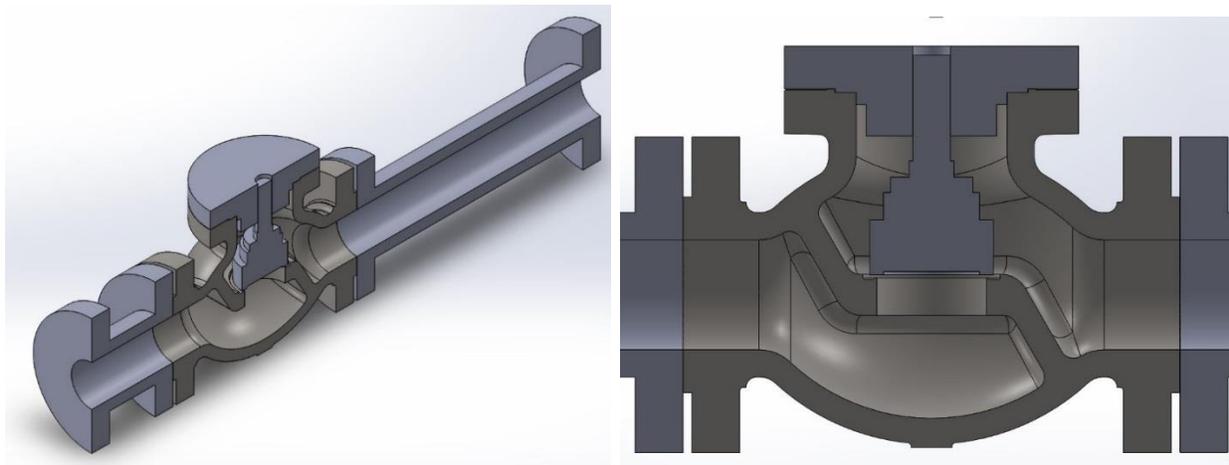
Cross sectional area of Valve assembly indicating Valve Plug position
